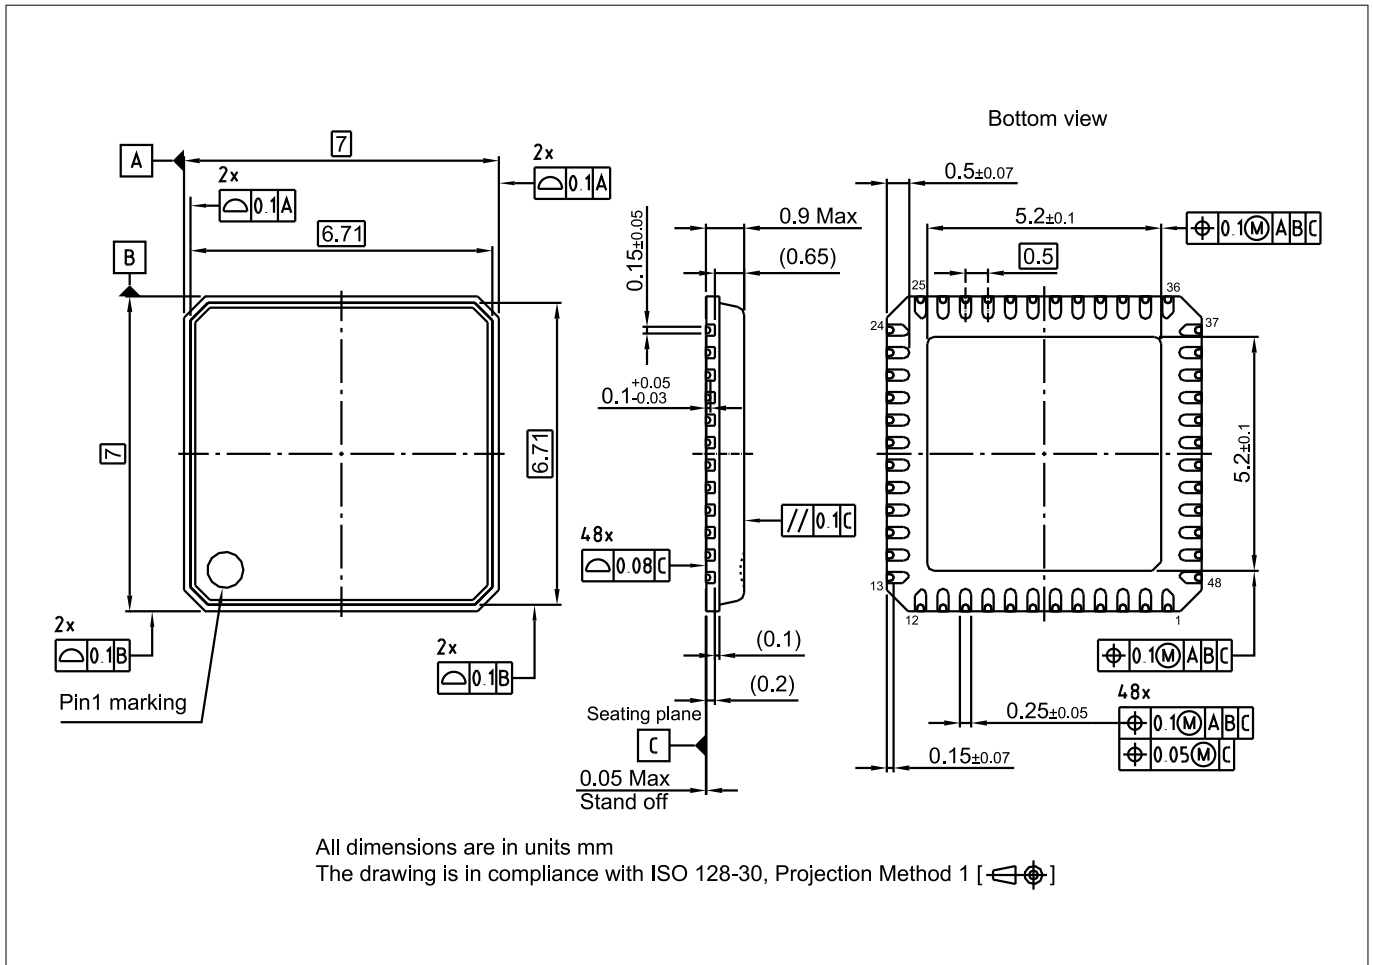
Package outline VQFN-48-79 (UD step only)³⁾
